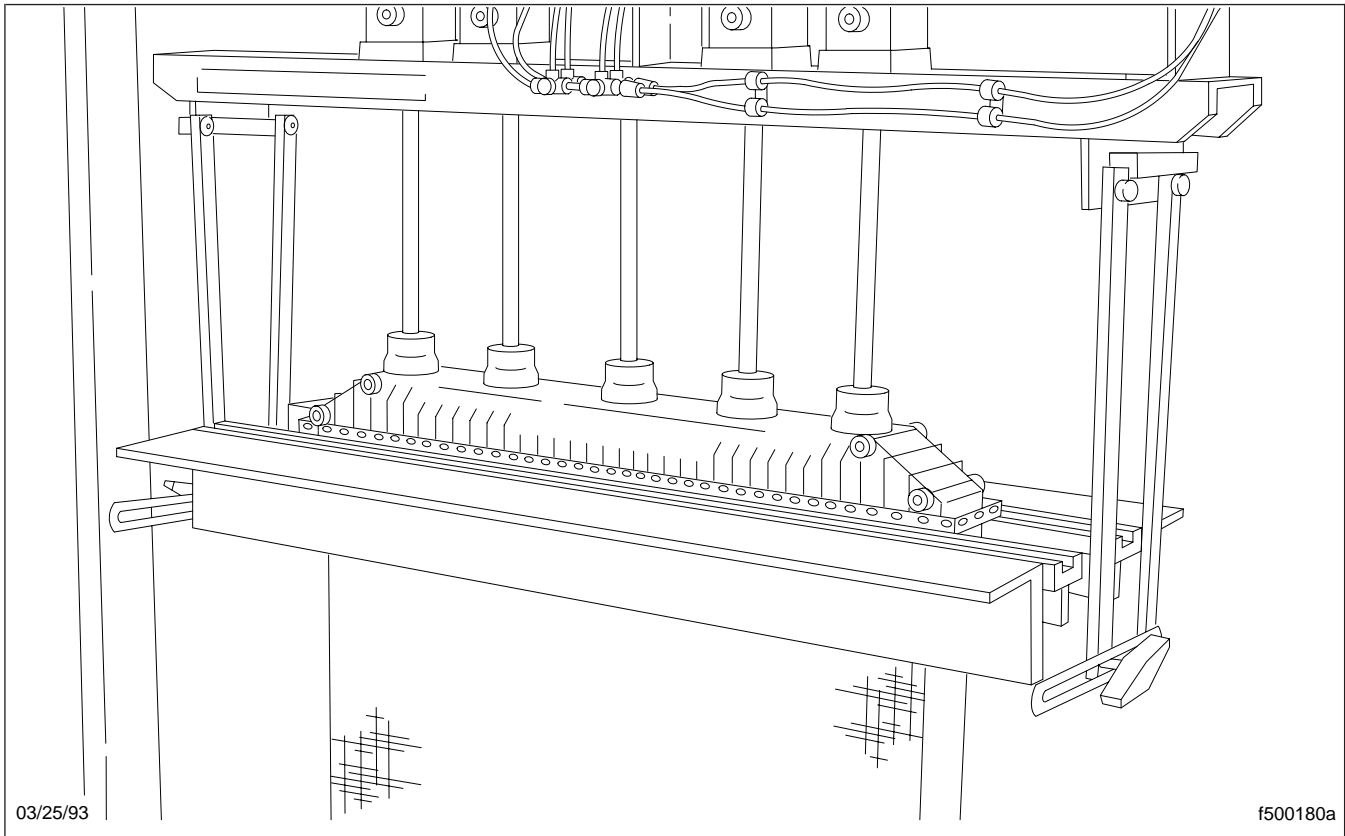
, Clamp the Radiator in the Disassembly/Assembly Fixture
